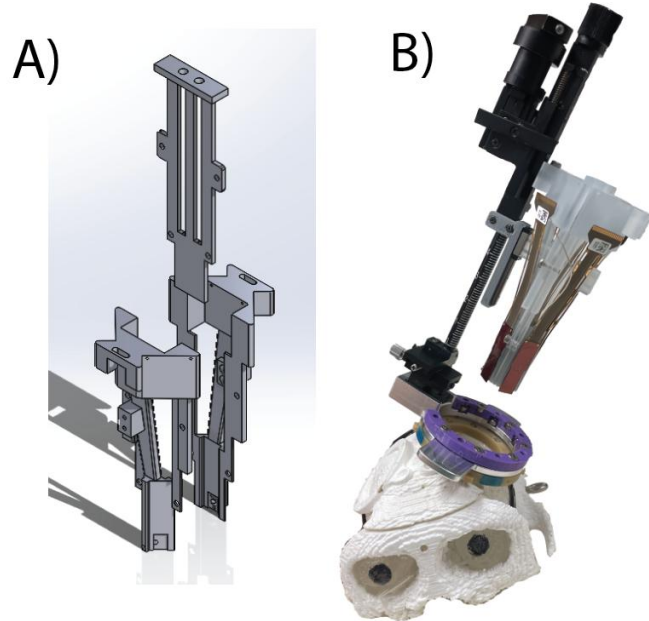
Six-probe fixture design and physical implementation. (A) CAD model in SolidWorks showing the exploded version of the fixture. (B) Fully assembled fixture mounted on a model chamber.
